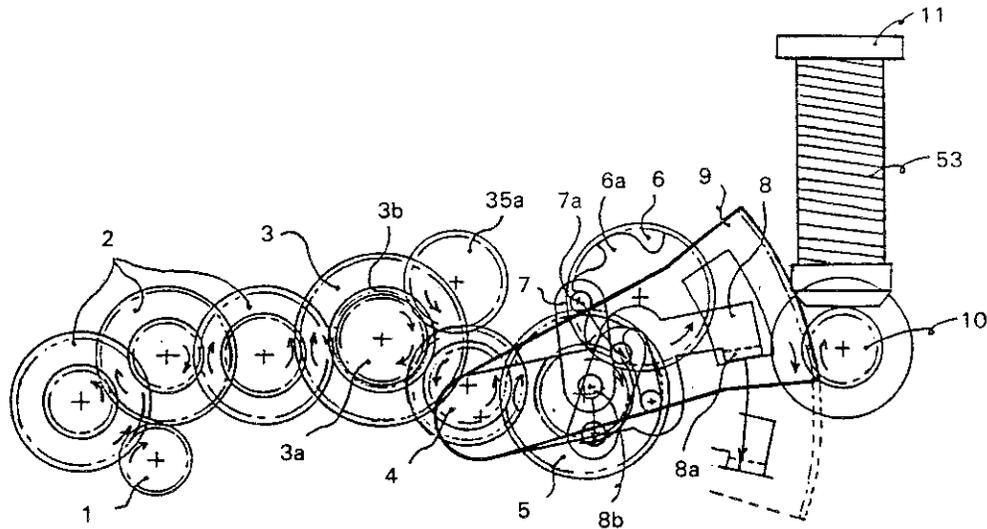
Winding (Lower) Assembly During Forward Rotation (Mirror Up)
